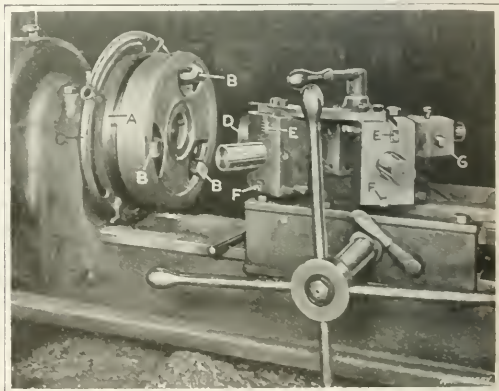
No. 6 Warner & Swasey Turret Lathe tooled up for facing and counterboring Crankshaft Flange Fit in Flywheels and facing Rim around Flange Fit
